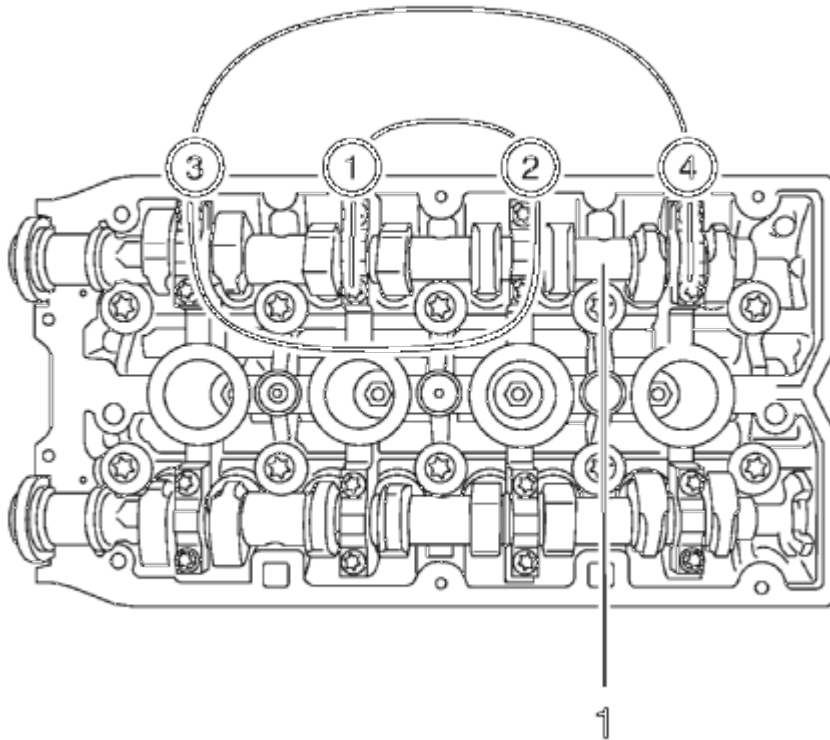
Intake Camshaft Bearing Cover Bolts Tightening Sequence
